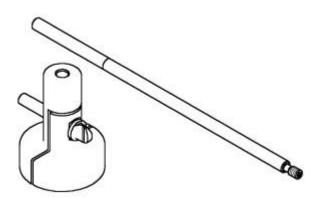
Counter Balance Shaft Installer - Remover - 8641 Courtesy of CHRYSLER LLC
